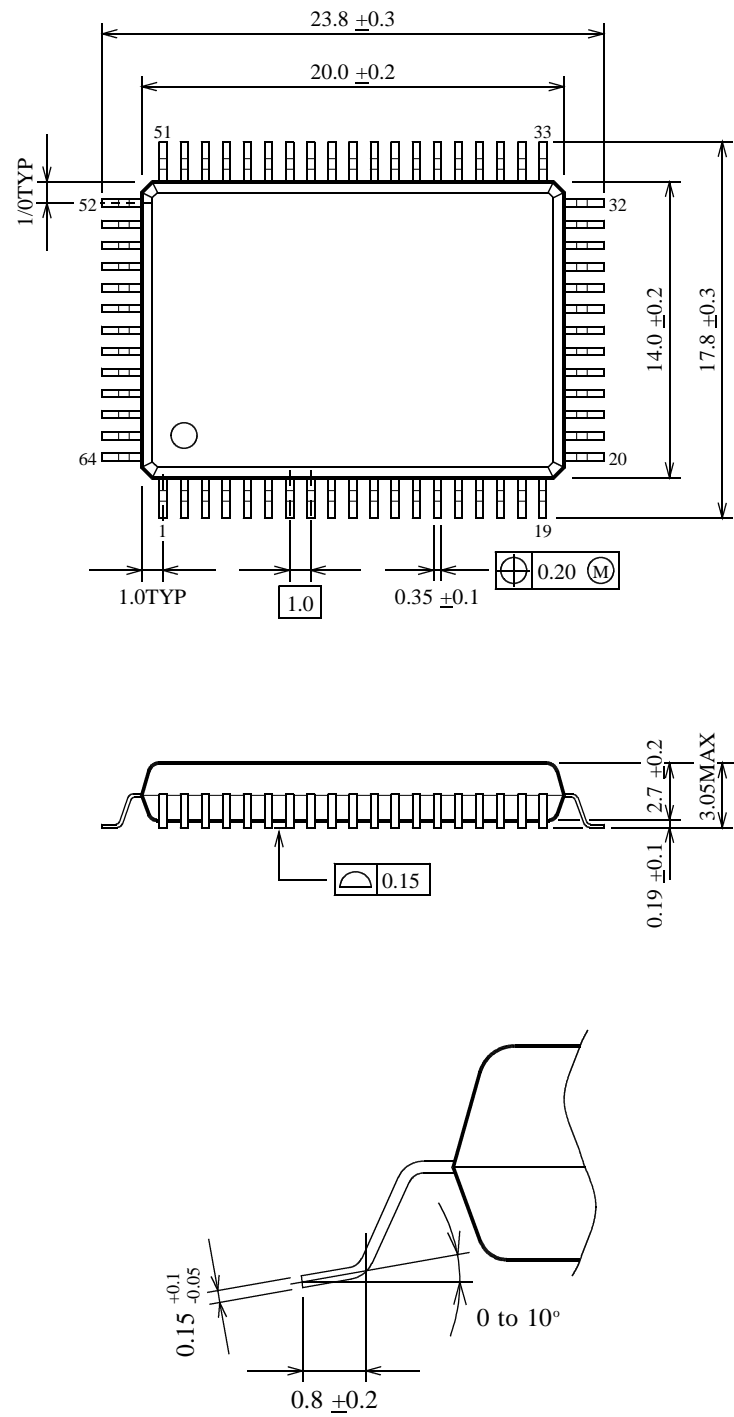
(Outline Drawing of PPMC-104BFP)
